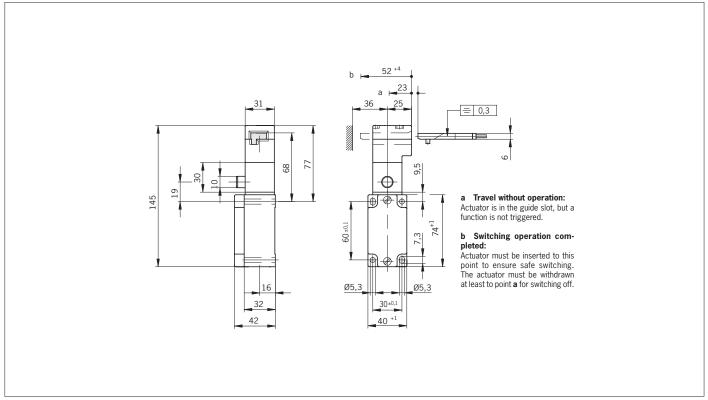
Dimension drawing for NZ1VZ-...VSH with cable entry
